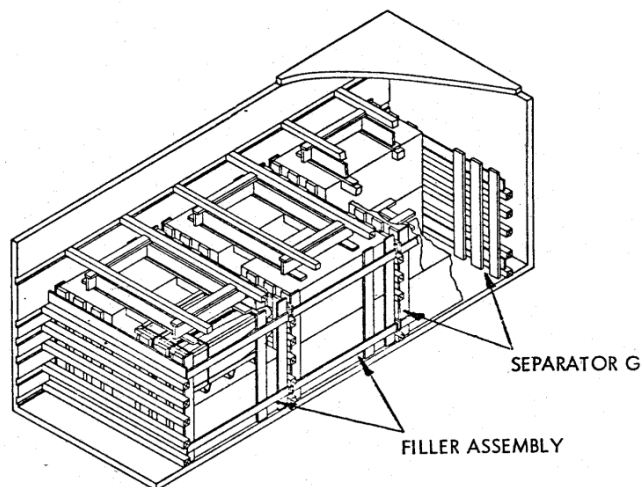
Dunnage design and load pattern, general purpose bomb MK 82 (thermally protected) unit loads, showing use of separator gates and filler assembly.
